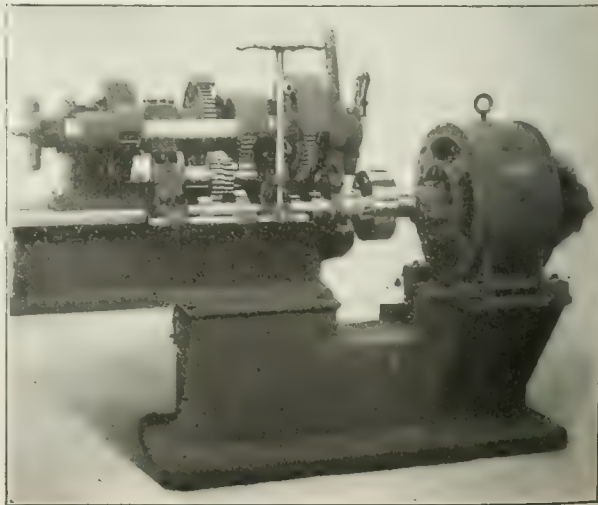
Former Partial Guarding of Small Lathe Headstock.
